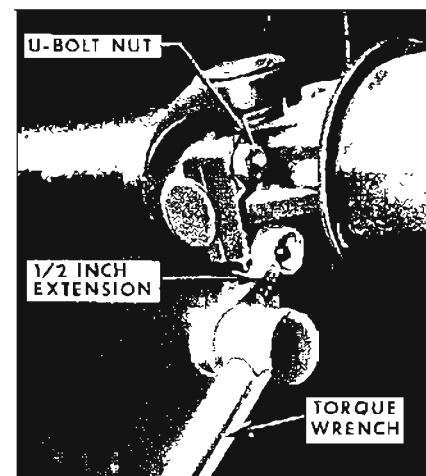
Using Extension to Torque U-Bolt Clamps
